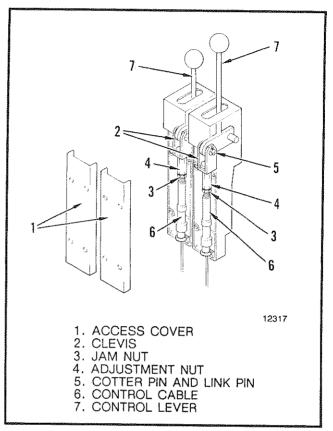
CONTROL CABLE ADJUST-MENTS
